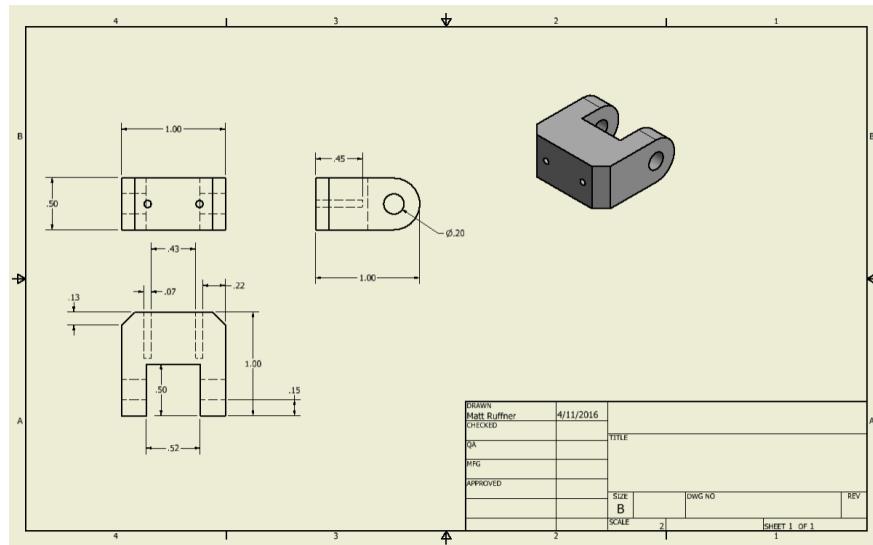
Bottom Shaft Anchor. Drawing showing bottom mounting point that affixes steel rods to driven shaft. Dimensions in inches.
